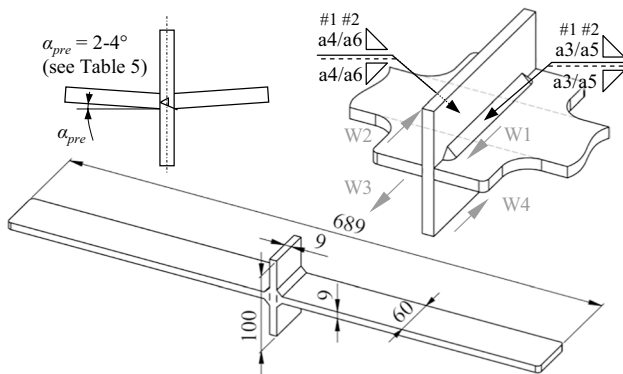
Shape and dimensions of the test specimens and welding sequence (weld IDs are denoted with “W”)
